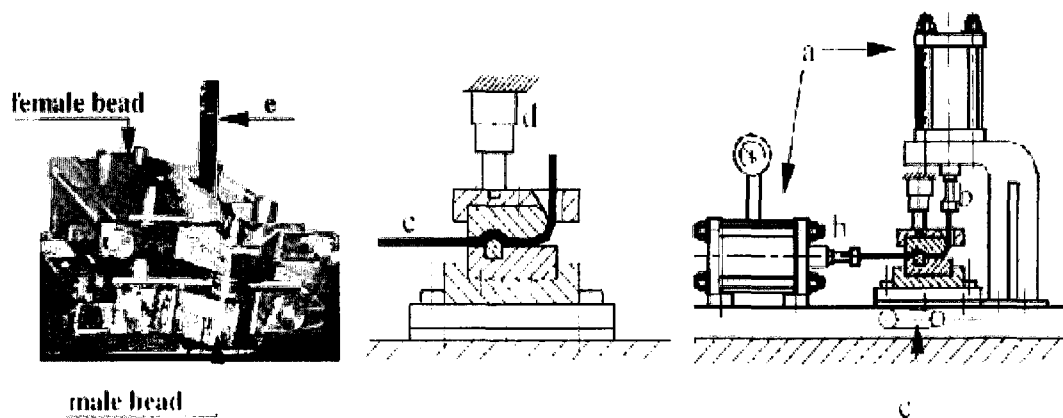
Experimental Setup of the Drawbead Tester: (a) Hydraulic Cylinders; (b) Load Cells; (c) Pressure Regulator Valve; (d) Transducer; (e) Test Strip.
